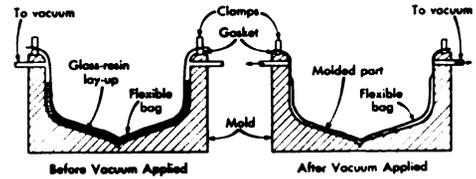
Vacuum bag molding. Pressure results in denser, sounder moldings.
